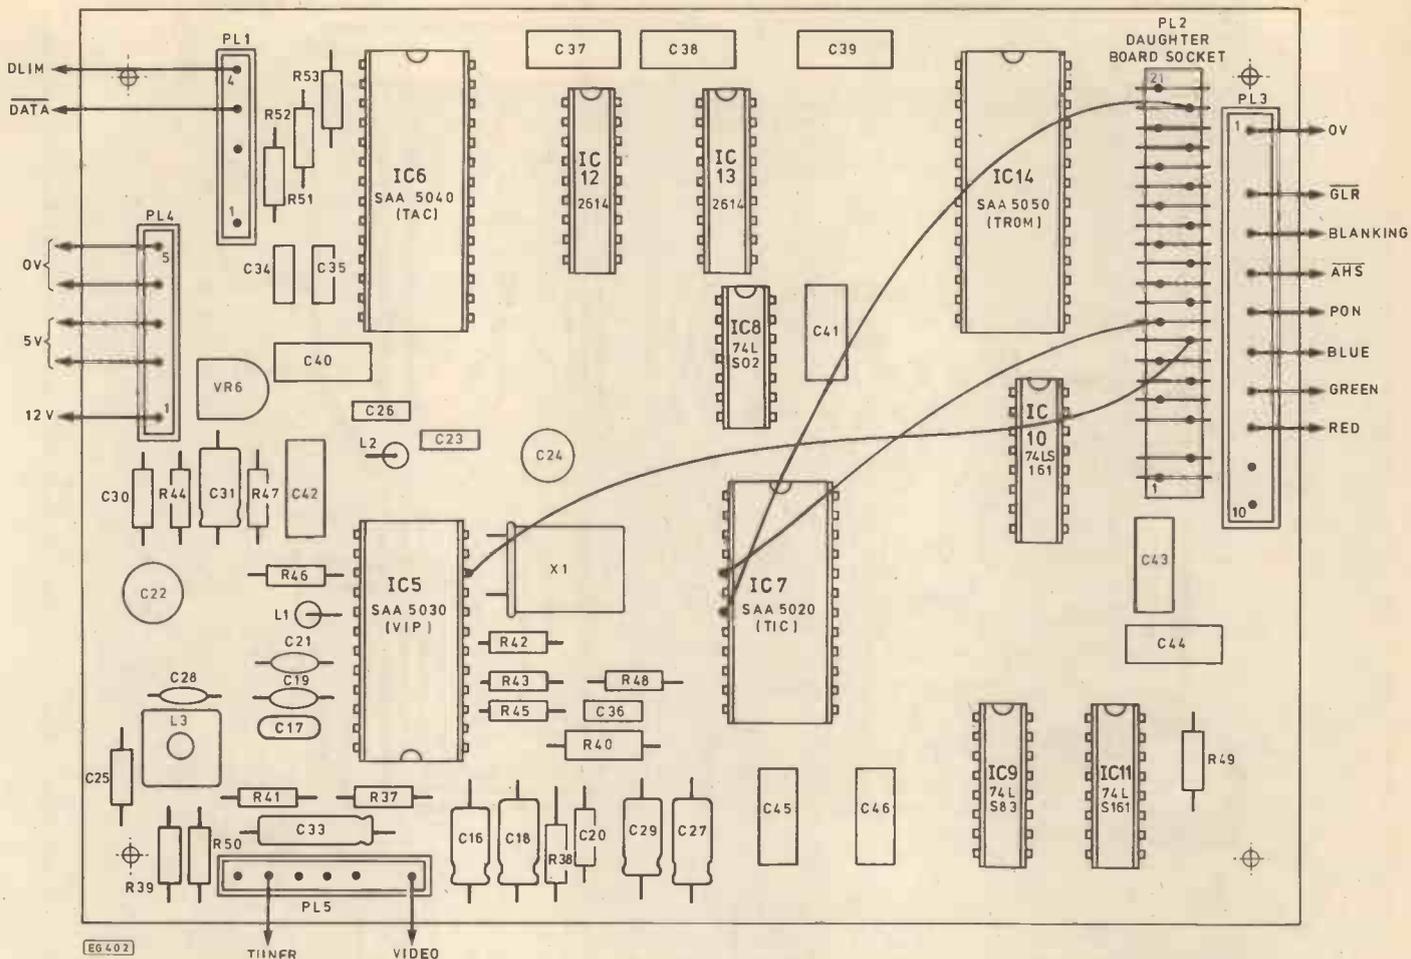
Component layout of the Decoder Board. Note C32 is not used on the supplied board
